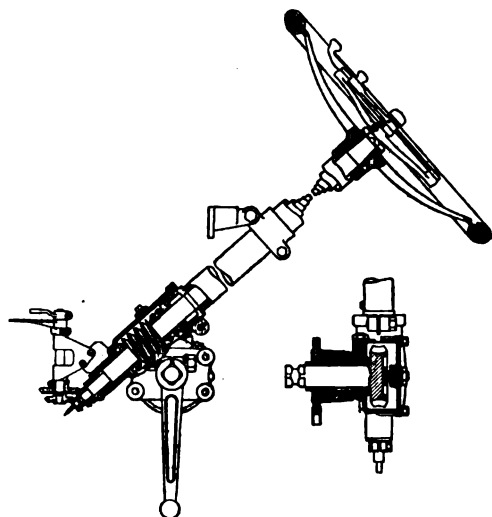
Typical steering mechanism (with interior tubes for ignition and carburetor control).
